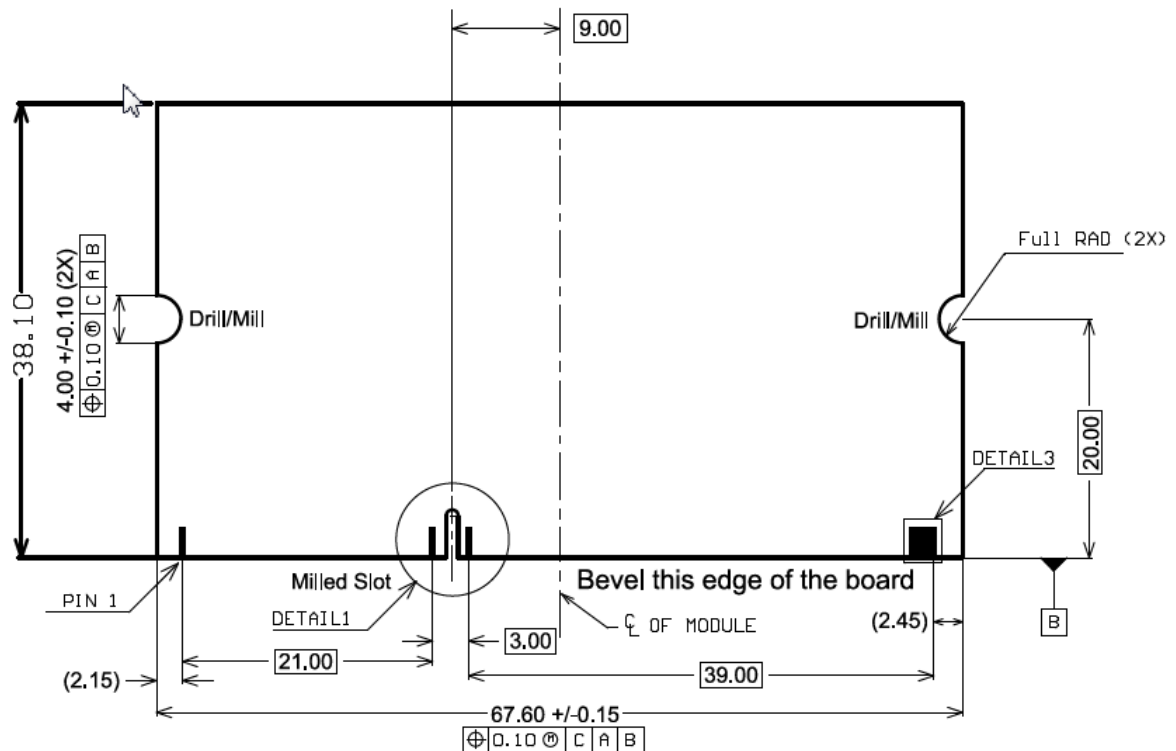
PCB 90-000166R-5A Drawing Update for Notch Alignment
